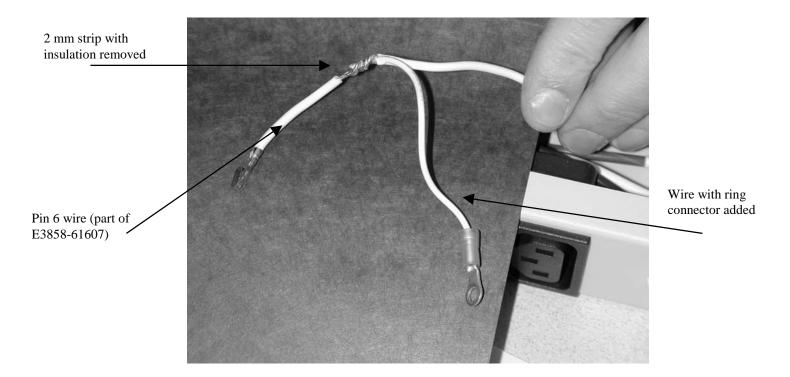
Adding a Wire With a Ring Connector to the Pin 6 (E3858-61607) Wire.
